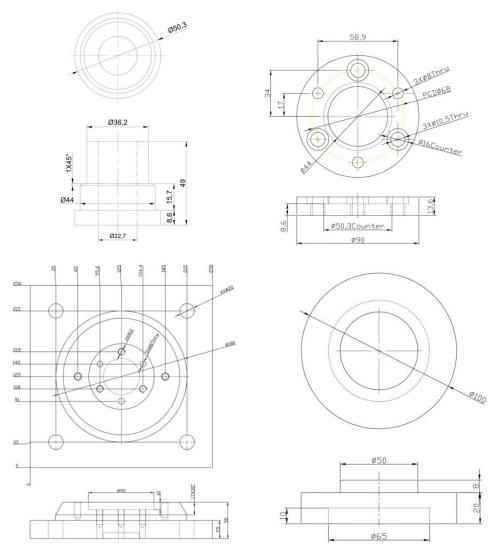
,12,13,14: Design of Lower Die, Lower Die holder, Die plate and spring guide plate
